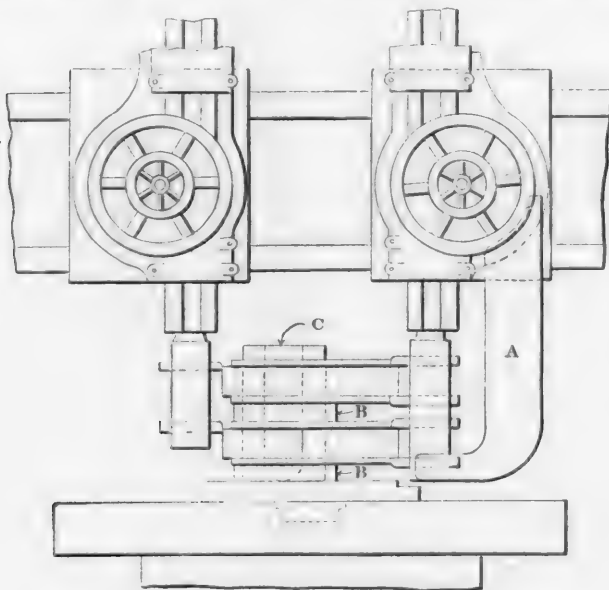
TURNING ECCENTRICS ON BORING MILL.
